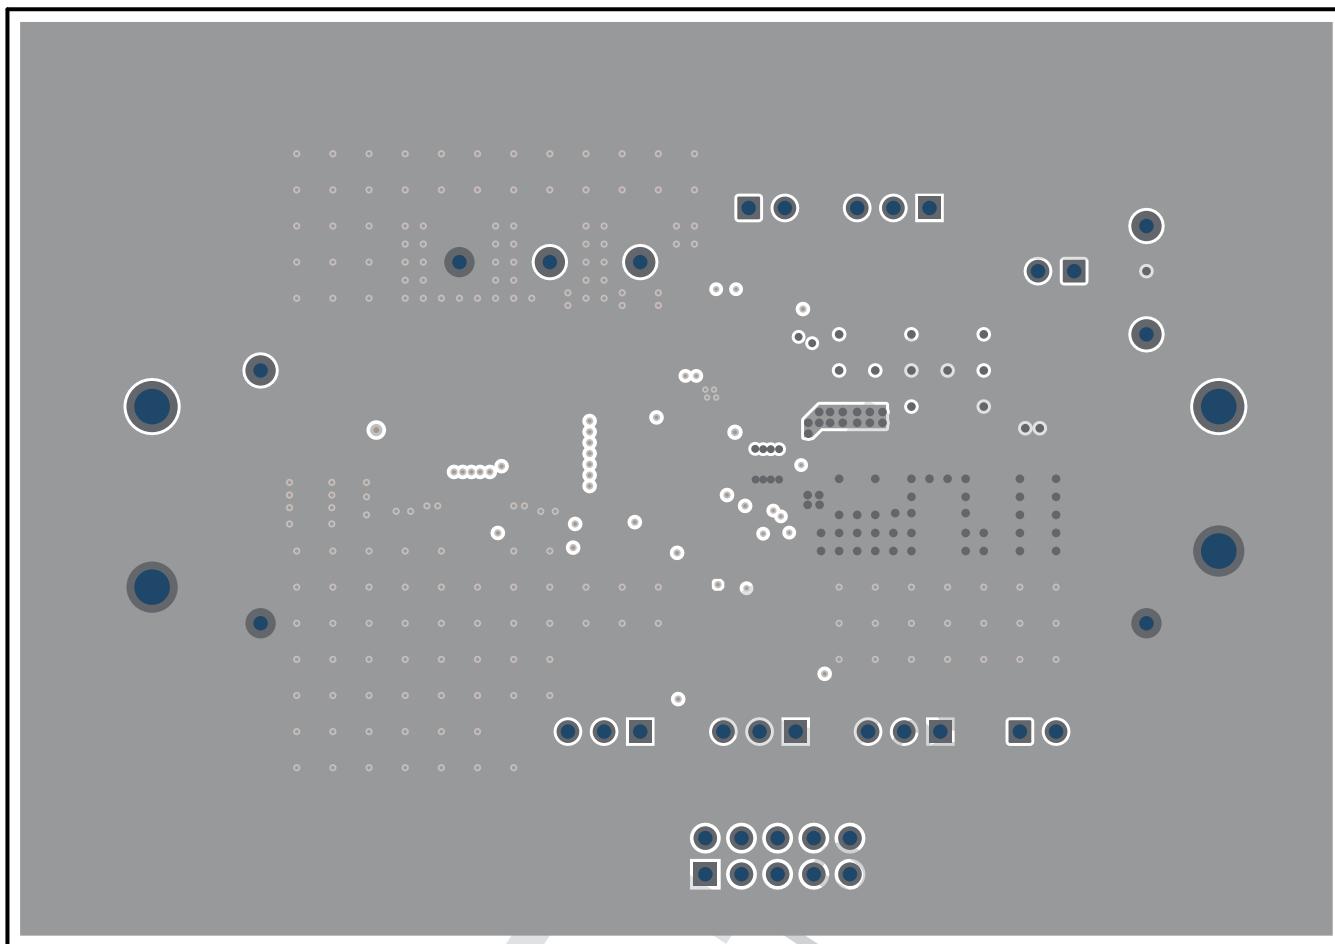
TPS55288EVM-053 Bottom-Side Layout
